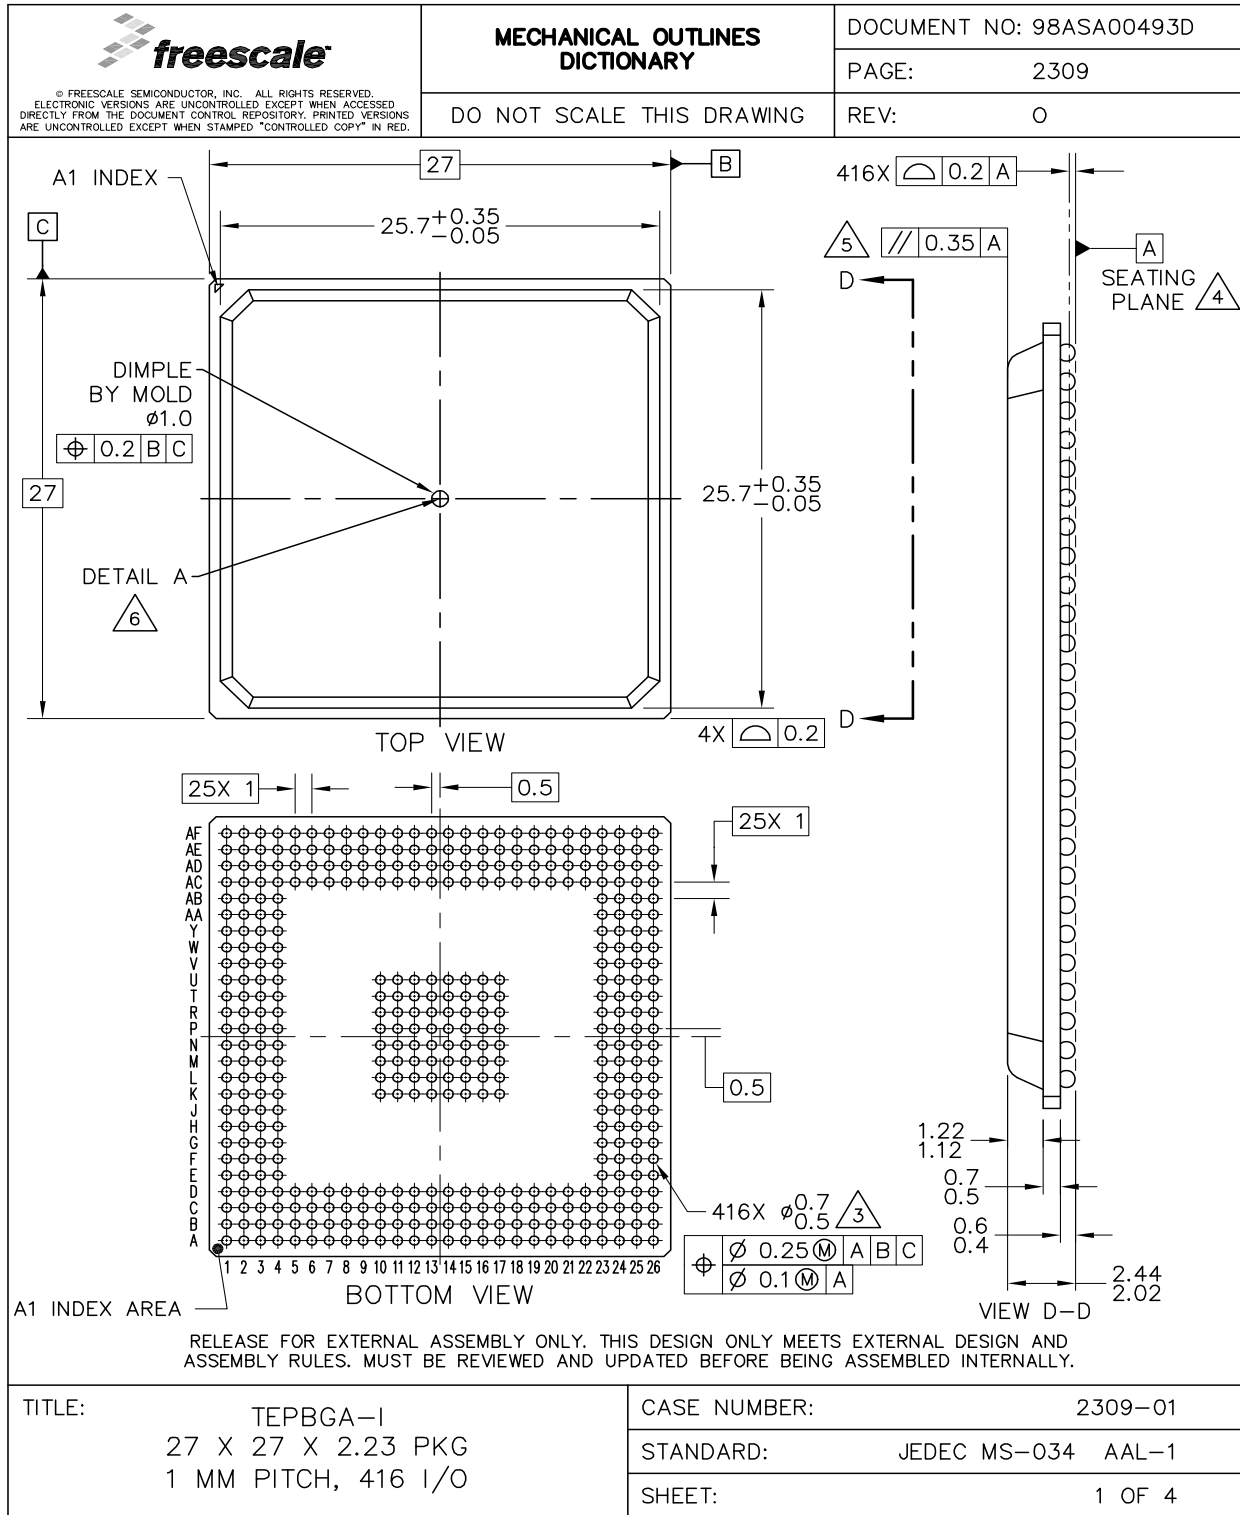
416 TEPBGA (emulation) package mechanical drawing (Sheet 1 of 3)
